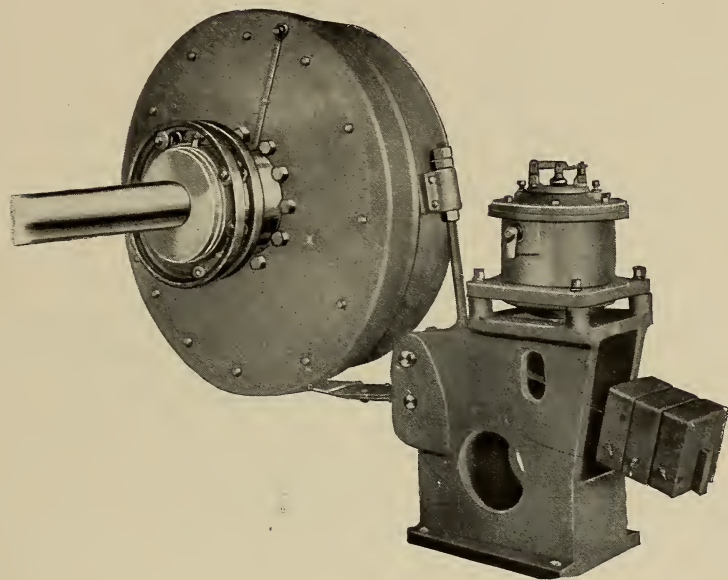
MAGNETIC CLUTCH AND BRAKE ASSEMBLED.
